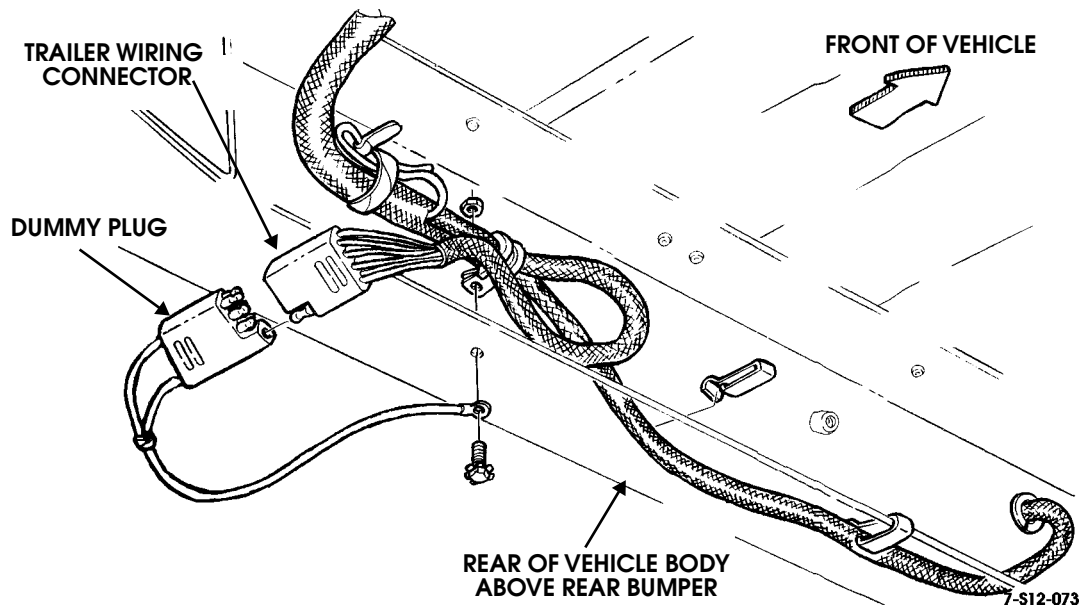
Trailer Wiring Connector and Dummy Plug Location
